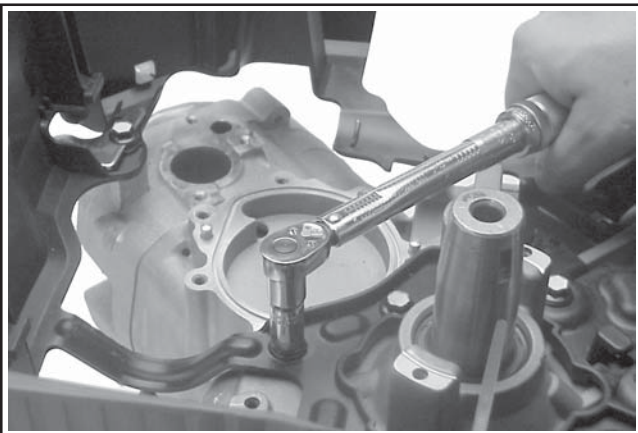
Torquing Screws and Also Showing Lift Strap Mounted.
